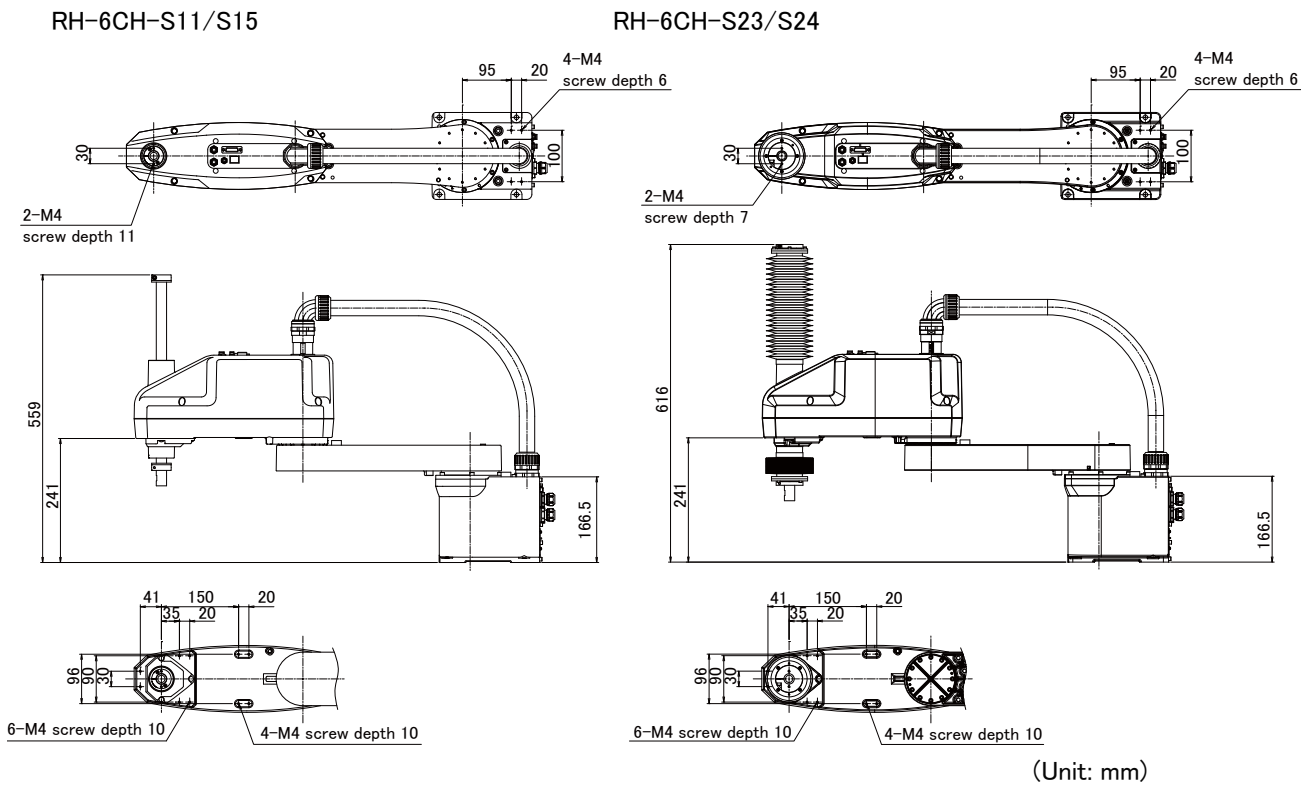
Location of screw holes for fixing wiring/piping (RH-6CH-Sxx)
